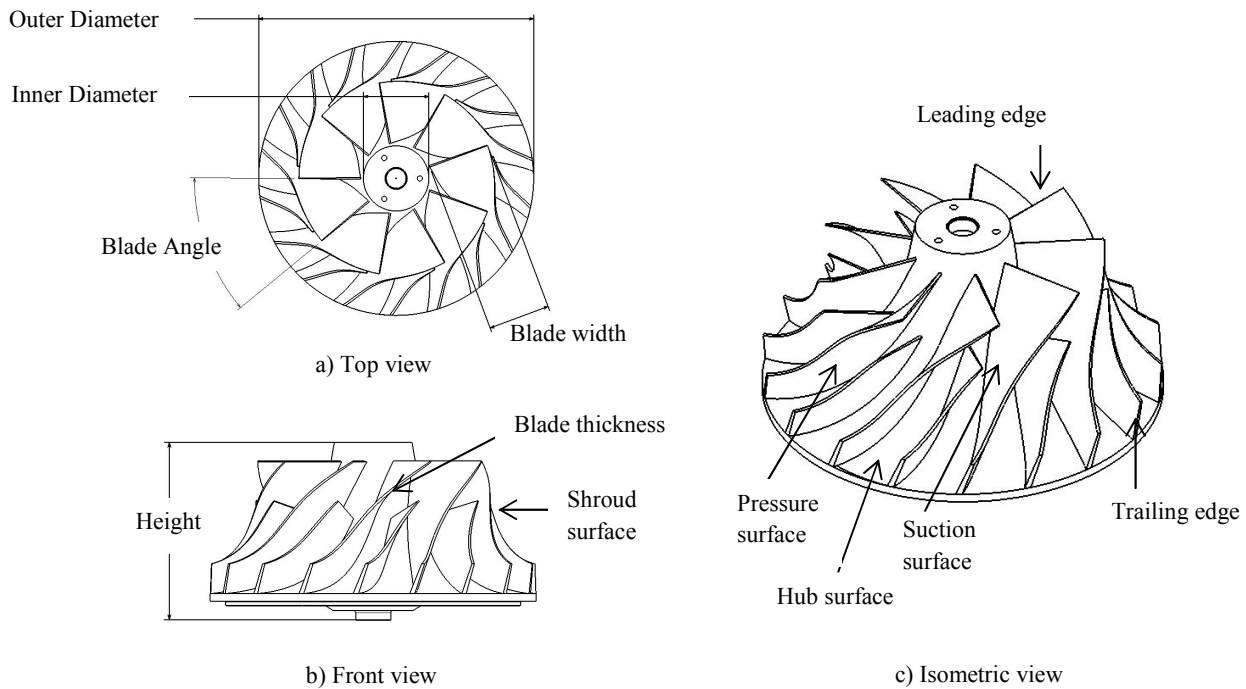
Geometrical view of an impeller; (a) Top view (b) Front view (c) Isometric view.
